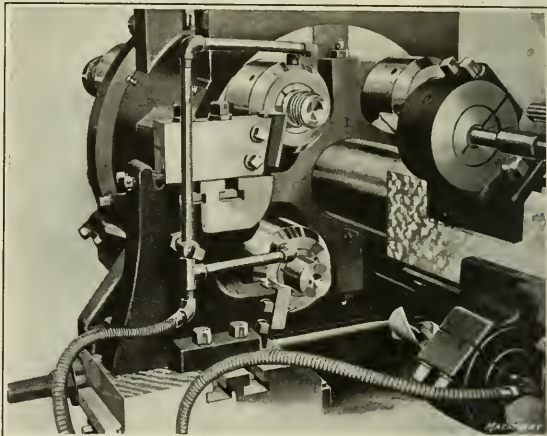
Rough- and Finish-forming Tools in First and Second Positions
